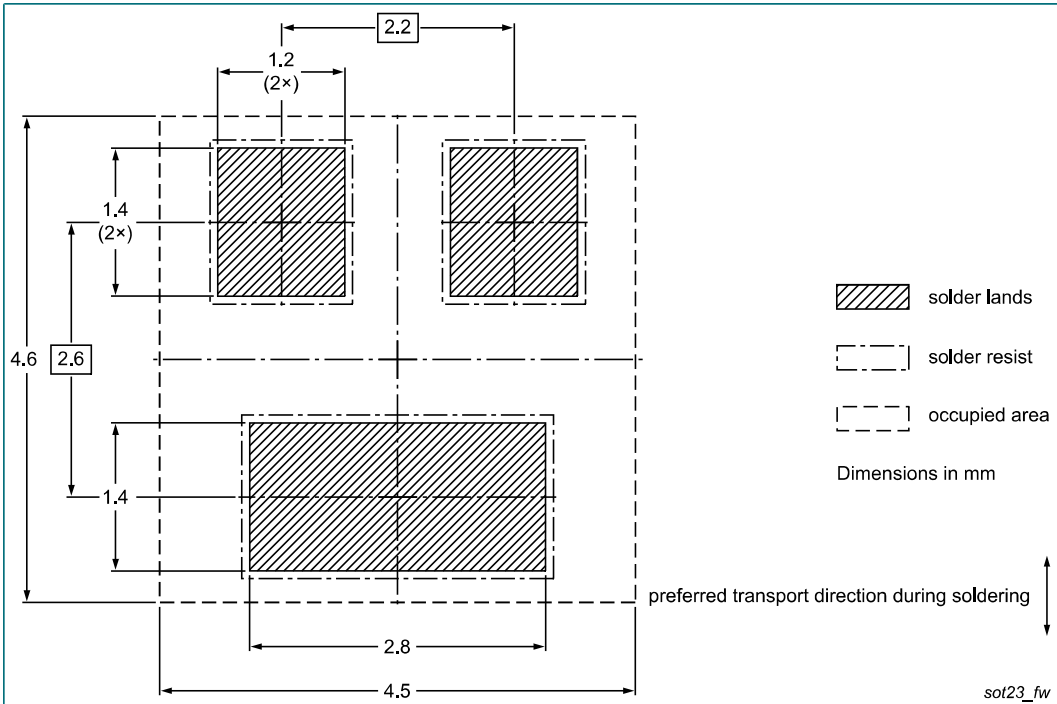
Wave soldering footprint for SOT23 (TO-236AB)
